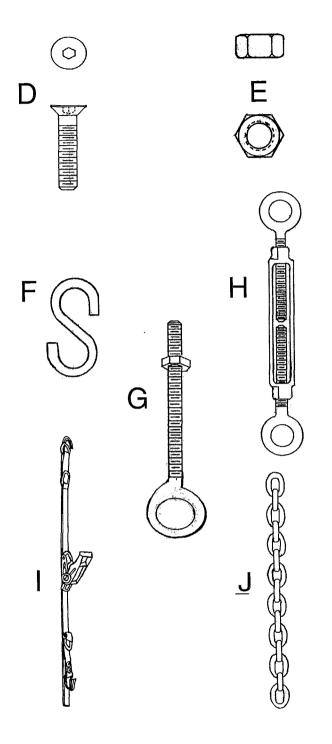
RONDAN jacket support clamp hardware: D, socket flat countersunk head cap screw; E, plain hexagon nut, F, S-hook, G, turned eye bolt, H, eye/eye turnbuckle, I, ratchet tie-down strap, J, welded steel chain. Drawings not to scale. See text for details of individual item size, threading (pitch), and other specifications.
